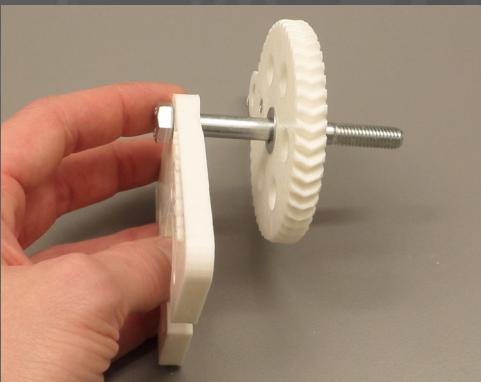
Fit the M8 main bolt in the unmounted side plate and slide the secondary gear onto this (with three washers between gear and plate).
